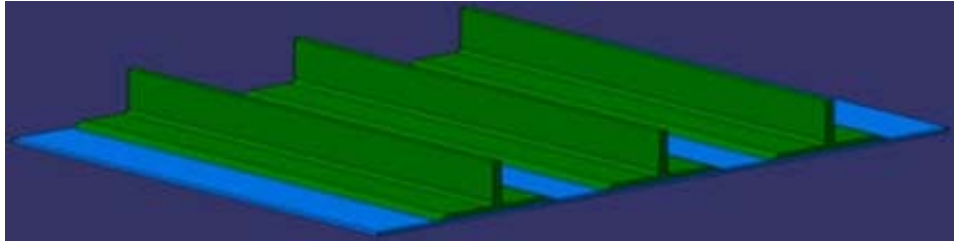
12" by 24" blade stiffened flat panel typically of wing structure designs
